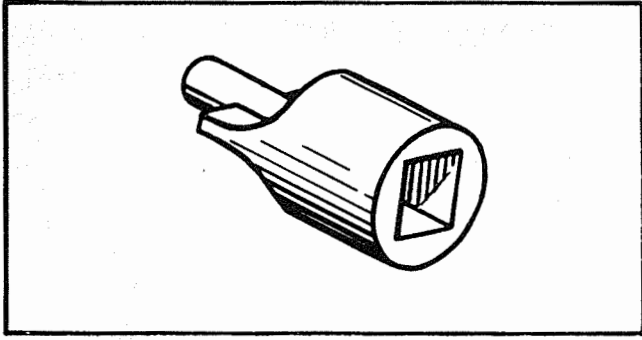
Cylinder Head Thermocouple Adapter Lug Wrench
